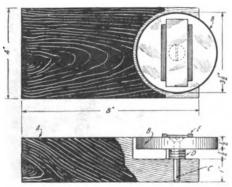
Shows a Turntable for Making Microscope Slides. The Base "A" Is Made from a Piece of 2"x4" Wood. The Revolving Table "B" Should be Made of Brass, but can be Made of Wood. The Steel Pin "C" on Which the Table Revolves Is Separated from the Base by the Washers "D." The Slide Is Held in Place by the Guides "E", as Shown.
